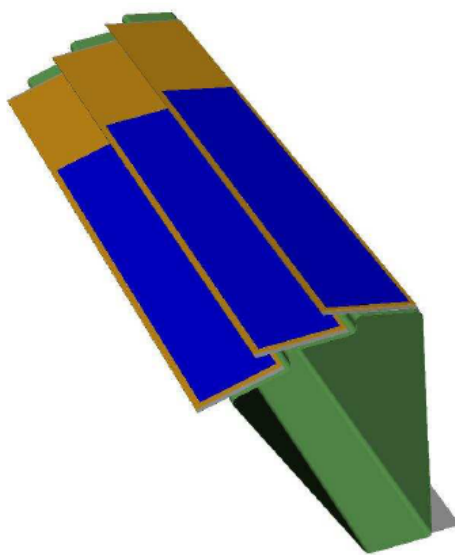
Thin wall carbon support beam (green) carrying a single inner barrel ladder and three outer barrel ladders. The beam in addition to supporting the ladders provides a duct for conducting cooling air and added surface area to improve heat transfer to the cooling air.
